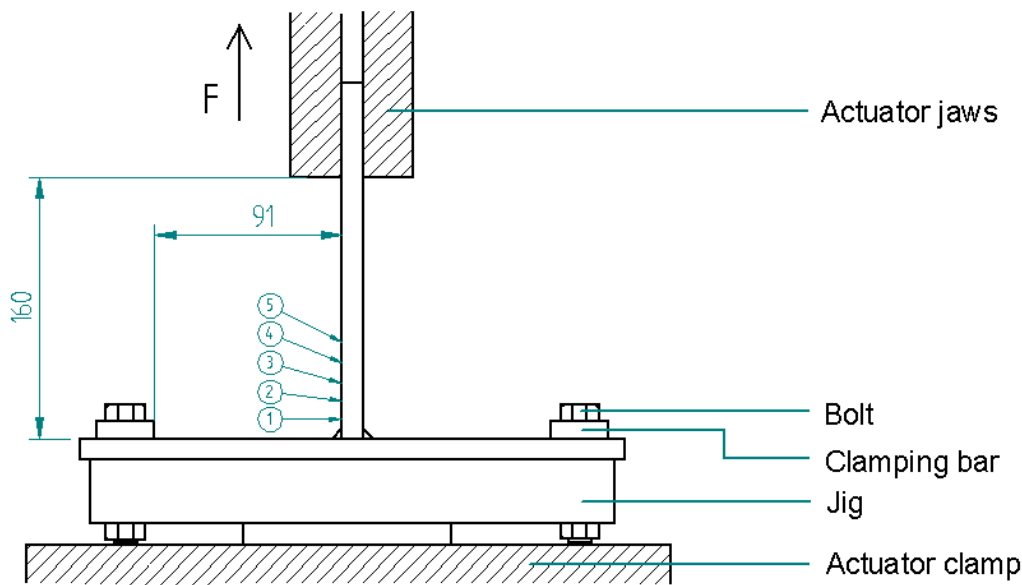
Test specimen/actuator assembly and strain gauge positions (dimensions in mm).
